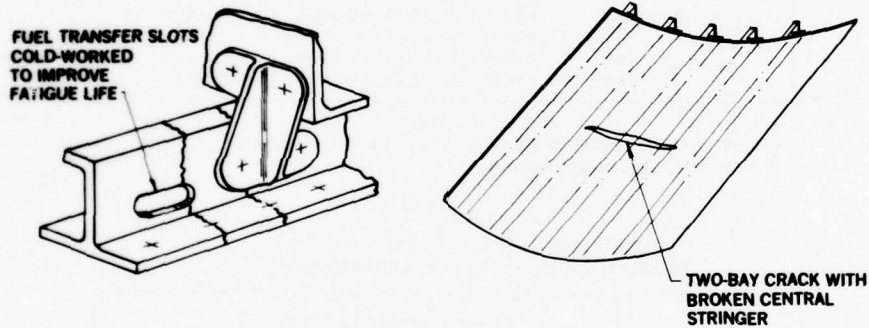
WING DAMAGE TOLERANCE SIZES
